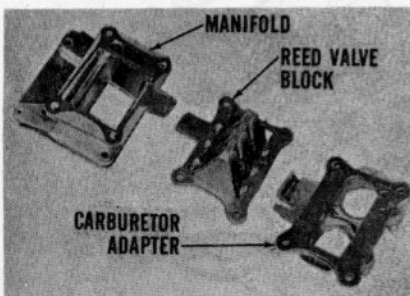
View of manifold, reed valve block with six reeds and carburetor adapter used with dual carburetor MC-40 and MC-70 models. Refer to Fig. MC21 for exploded view of reed valve block for single carburetor MC-30 engine which is of similar construction.
